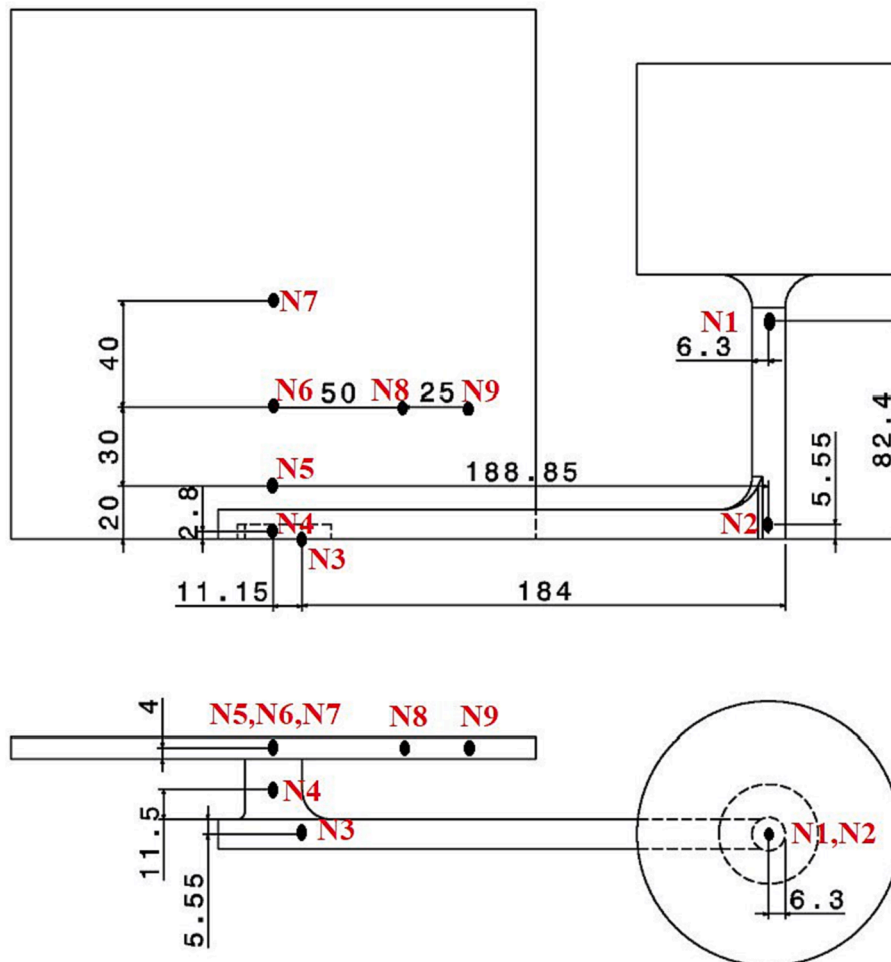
Location of thermocouples and tracking of molten metal (mm).
